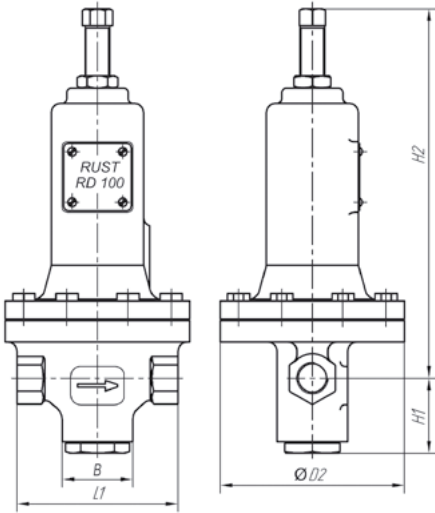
Overall dimensions of RD 100 series coupling design pressure control valve
